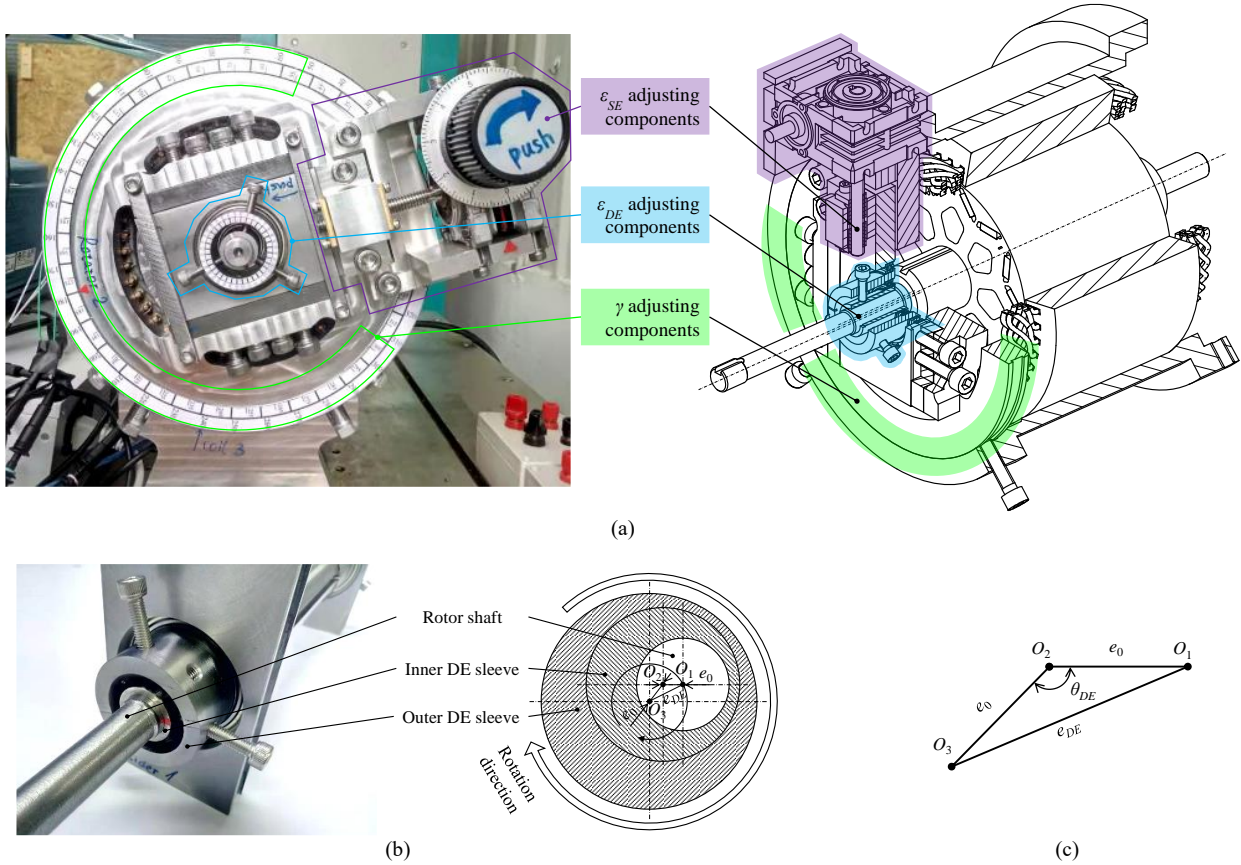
Eccentricity prototype motor. (a) Picture and assembly drawing of the eccentricity prototype motor. (b) Picture and schematic of the  $\epsilon_{DE}$  adjusting components. (c) Geometric schematic of the points  $O_1$ ,  $O_2$  and  $O_3$ .
